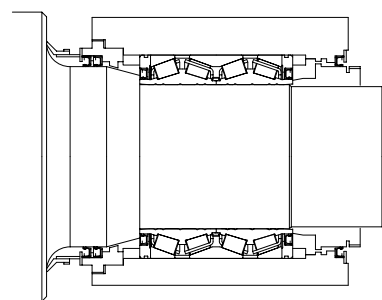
Cross-sectional View of a Roll-neck Bearing on a Rolling Mill
